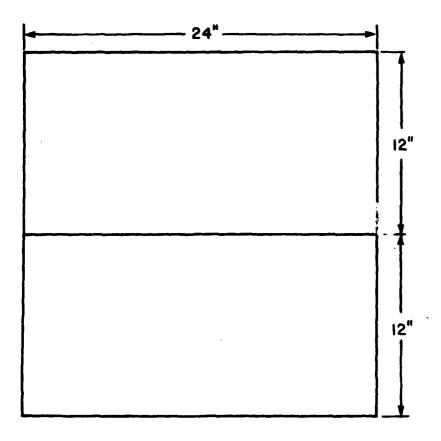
TEST PLATE ARRANGEMENT FOR UNRESTRAINED BUTT JOINTS
